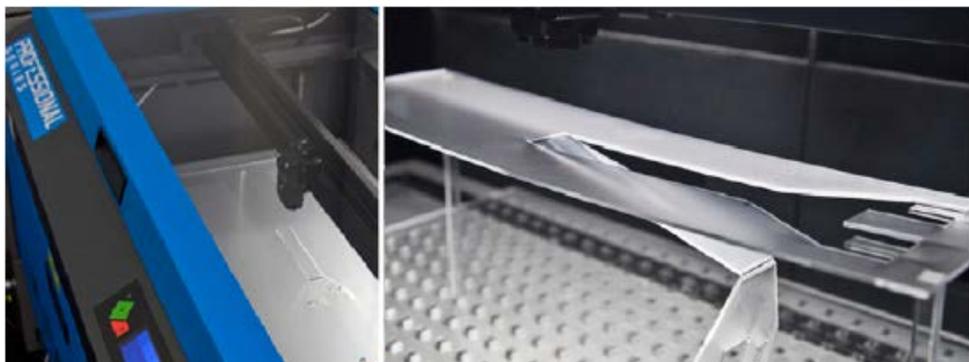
LaserOrigami fabricates 3D structure by bending, rather than using joints, thereby eliminating the need for manual assembly. (Source: "LaserOrigami: Laser-Cutting 3D Objects" [12], 2013)
